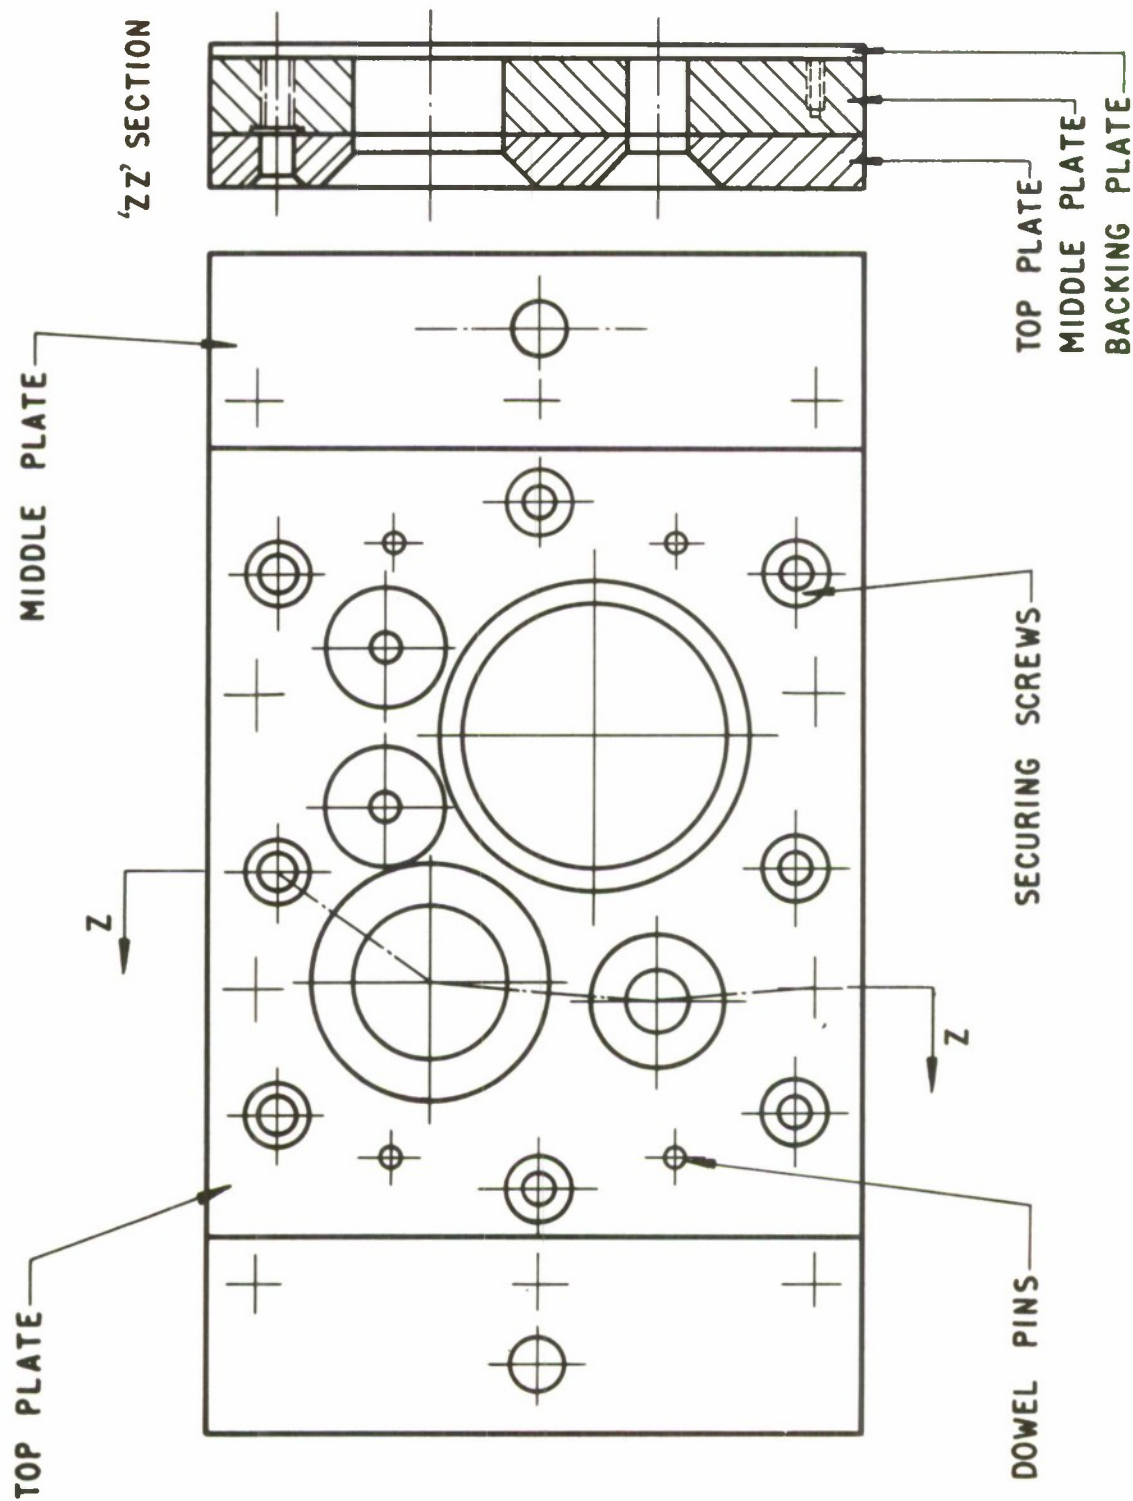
DETAILS OF GAUGE CONSTRUCTION
